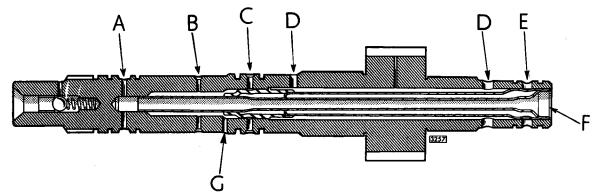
Longitudinal section of the forward sun gear showing the oil ways.
